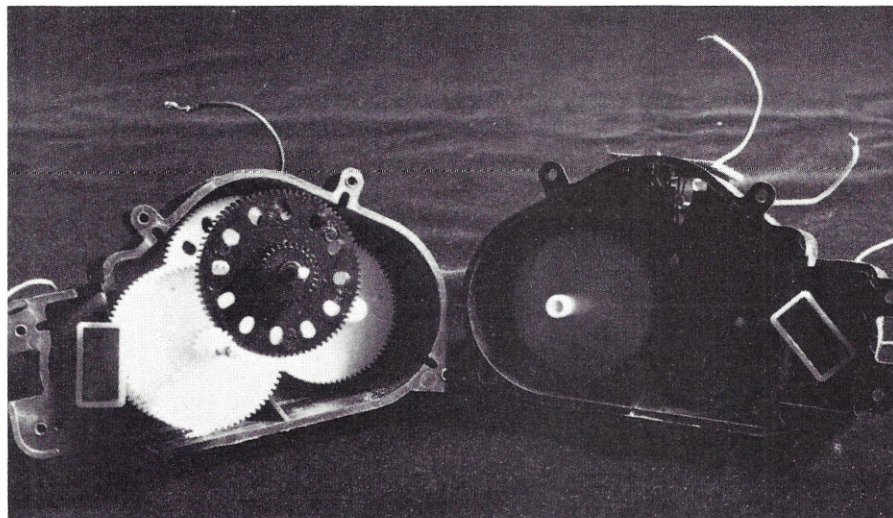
Open view of dual motor gear box. Top gear, in black, is used as a window for infrared sensors to sense position holes.
